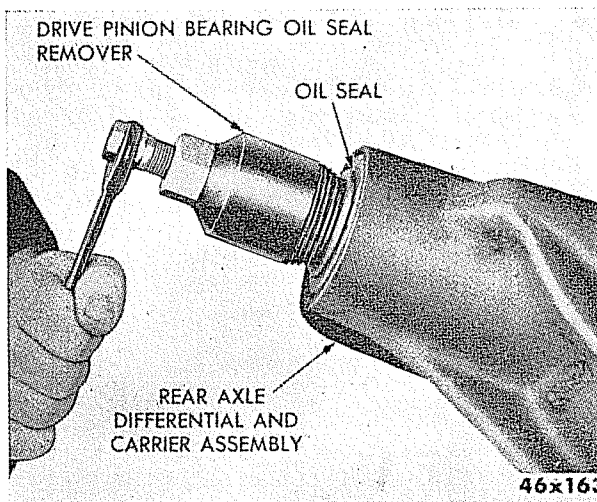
Removing Oil Seal From Carrier—Tool C-748.
